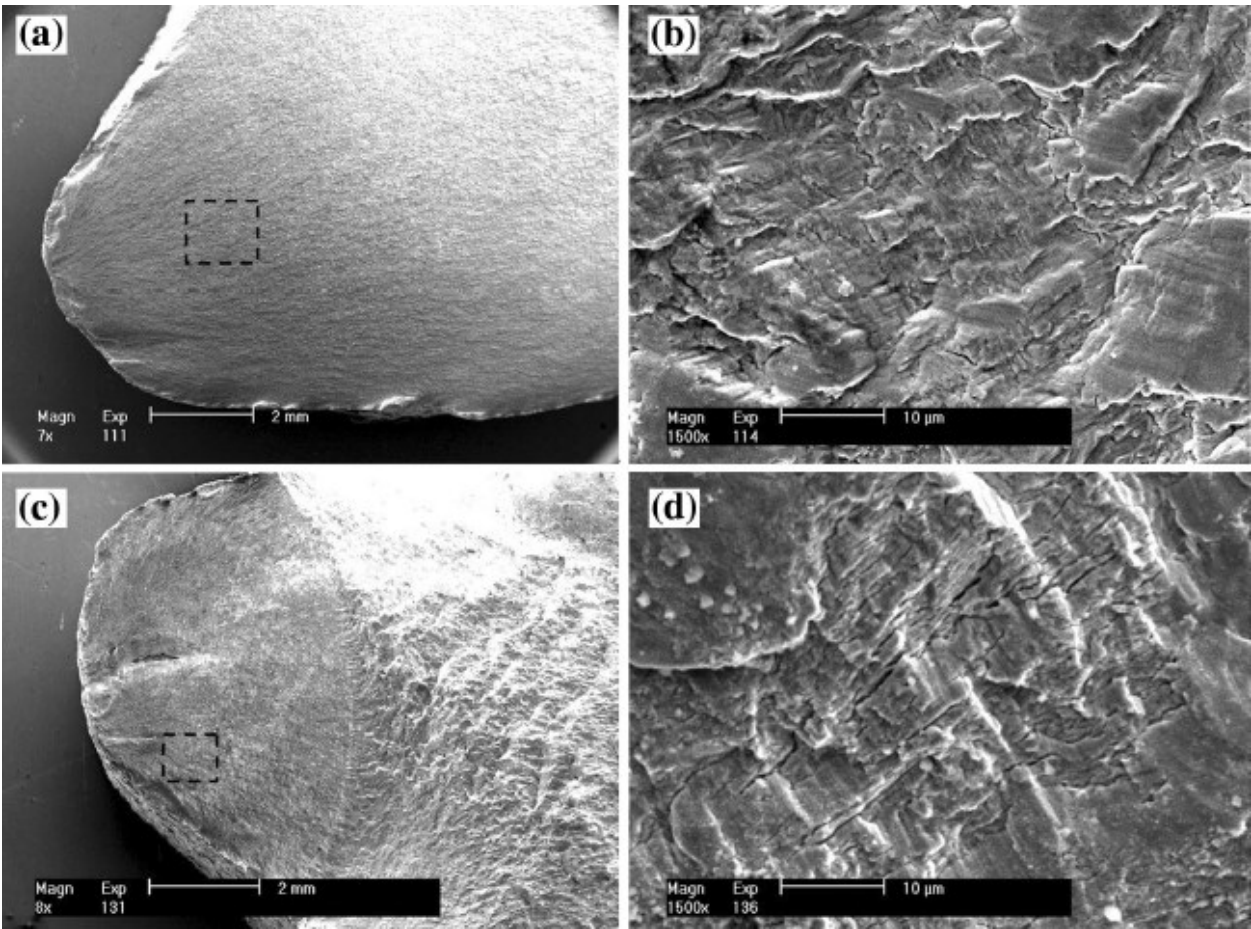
Fig. C : SEM observation on fracture surface: (a) general view on crack origin A, (b) boxed zone in (a) showing fatigue striations and secondary cracks, (c) general view on crack origin B, (d) boxed zone in (c) showing fatigue striations and secondary cracks
